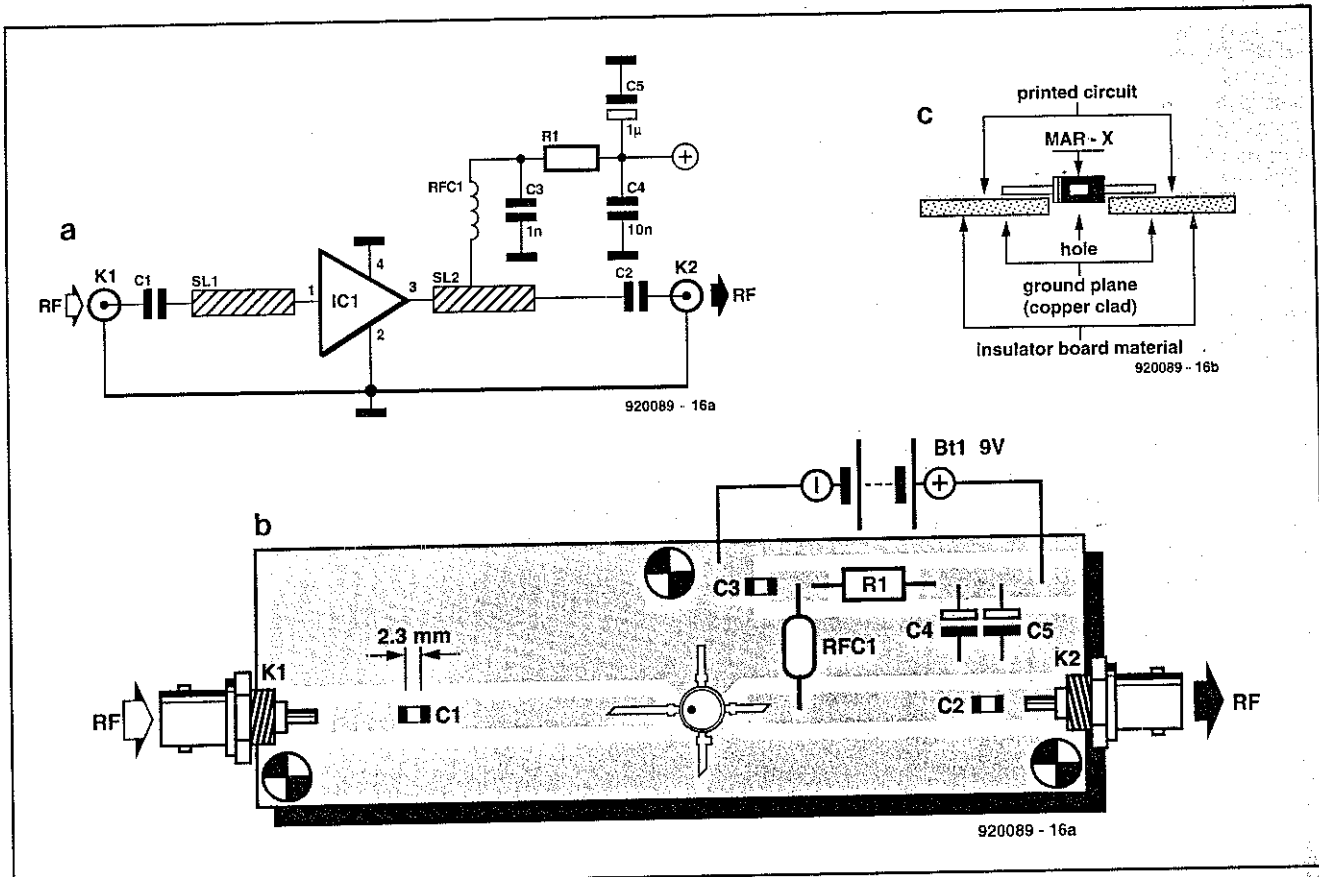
(a) Typical circuit diagram and (b) PCB layout for a MAR-x amplifier; (c) a hole is cut into the printed circuit board to accommodate the MAR-x body
